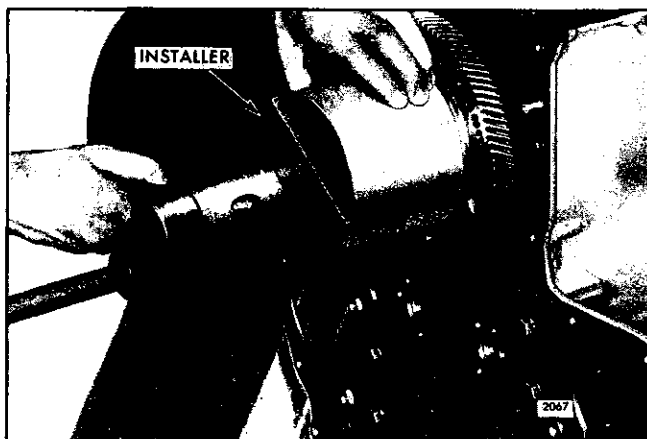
Installing Crankshaft Timing Gear Using Installer J 7557
